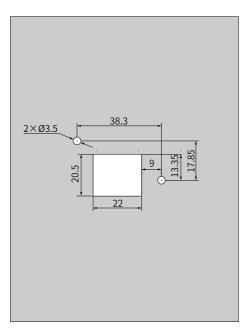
Dimensions (unit: mm) of the cabinet door opening for mounting the MD-BP-M
